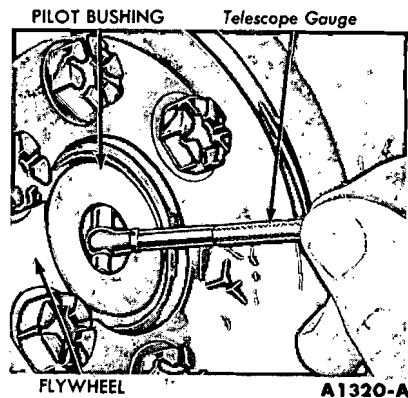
Typical Clutch Pilot Bushing Wear Check
